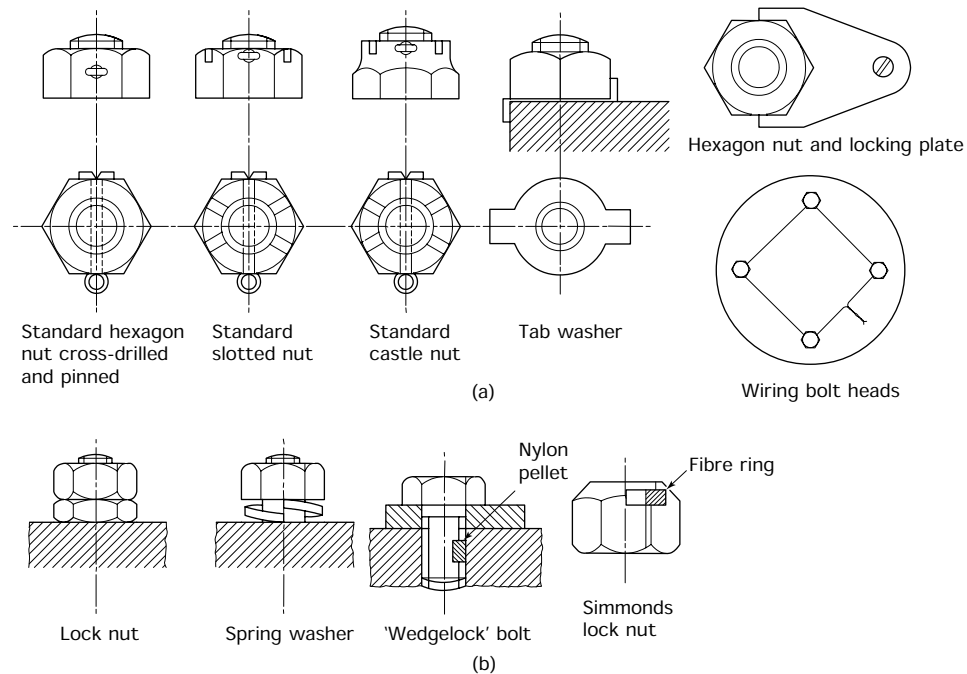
Locking devices for screwed fastenings: (a) positive locking devices; (b) friction locking devices
